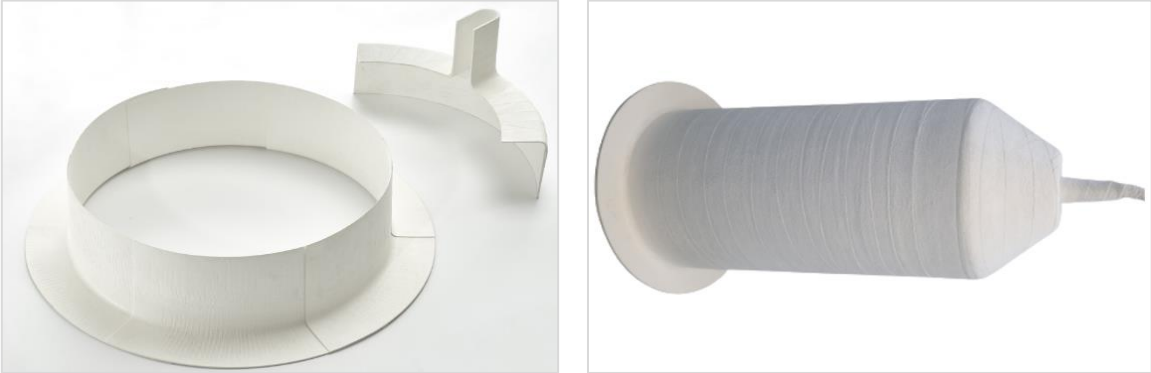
Insulation parts made of wet formed aramid board: commercially available angle ring and lead exit snout (left); prototype wall bushing (right); (Photos courtesy of Schweizer and Isotek.)
